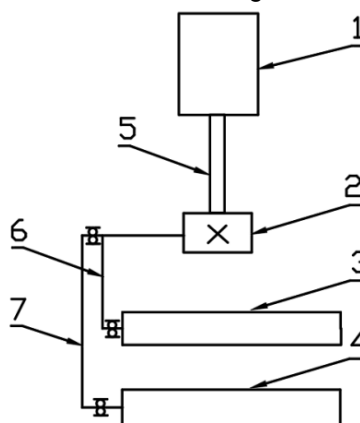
Schematic diagram of transmission system of double shaft type sweet potato haulm cutting return machine
